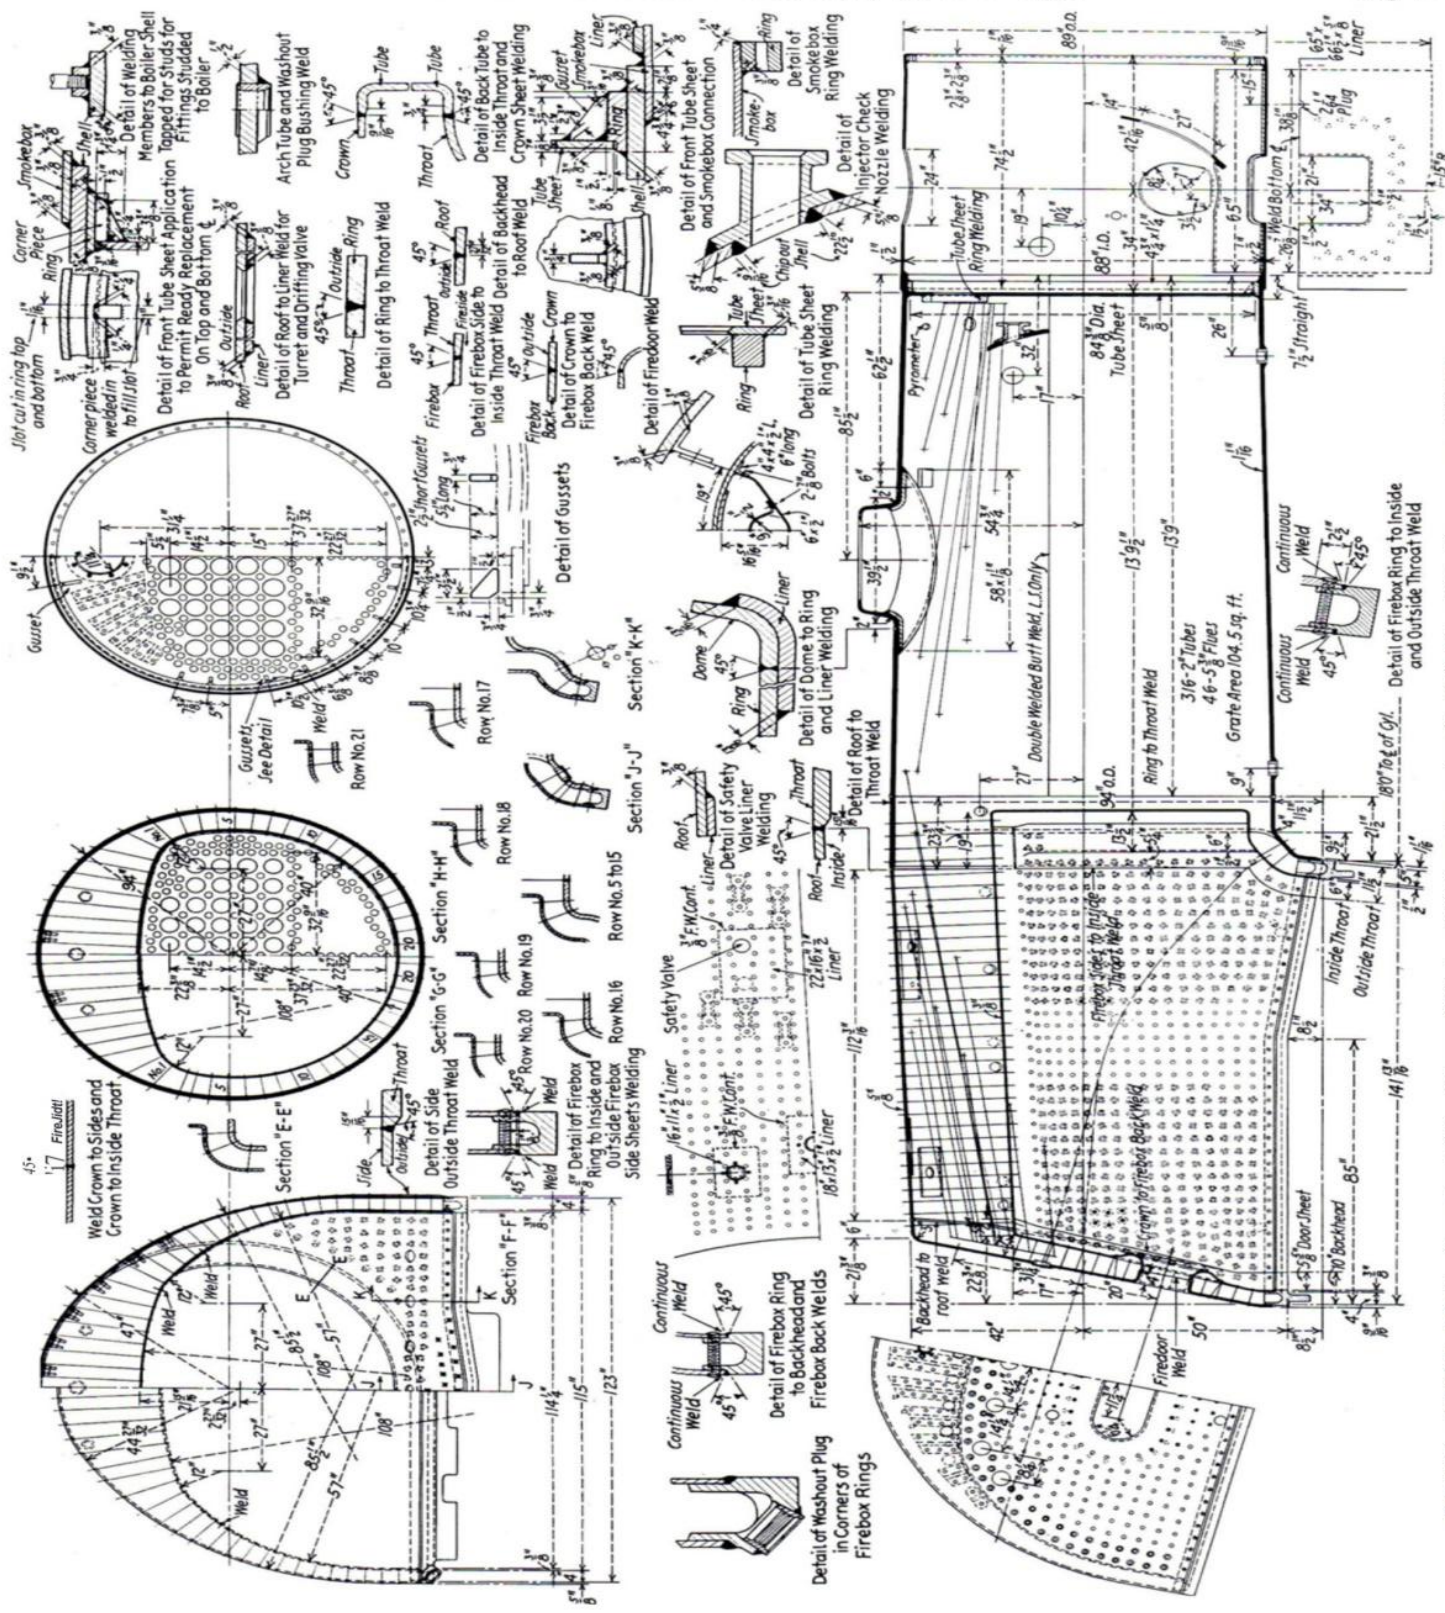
A II- Welded Boiler (Experimental) for Delaware & Hudson 2-8-0 Type Locomotive No. 1219, Class E-6a. Steam pressure 225 lb.; Type A Superheater.
